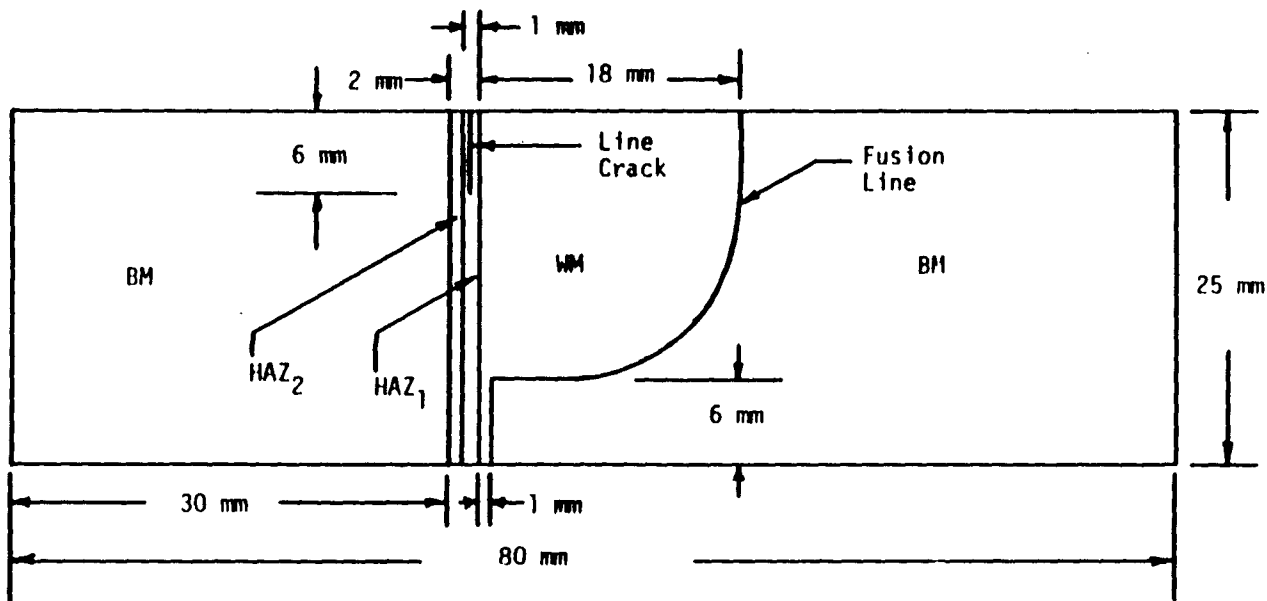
DIMENSIONS OF THE J-SHAPED WELD JOINT WITH CRACK
